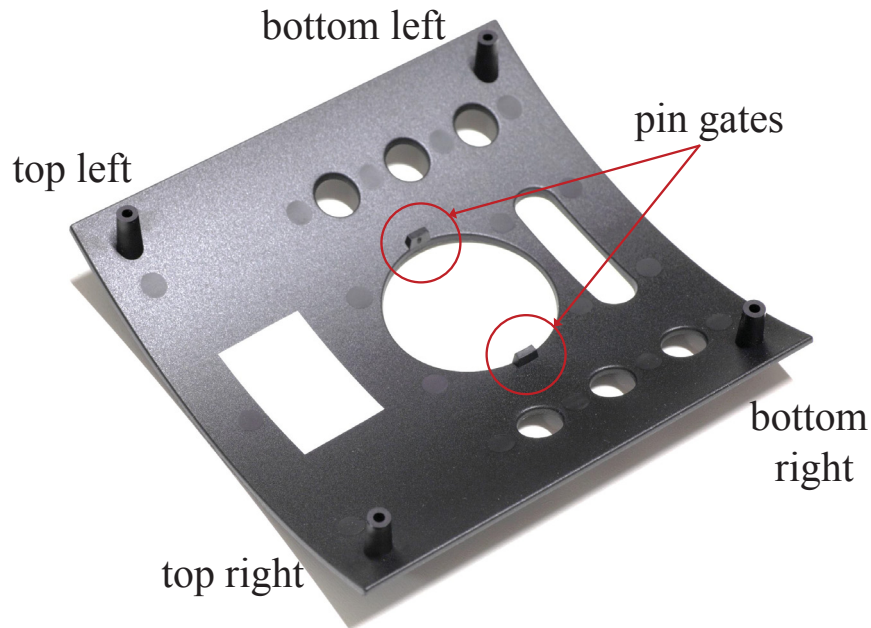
Back side of the injection molded part “Coffee Maker Front Panel”. The screw bosses in the corners of the part cause the inspected sink marks.
